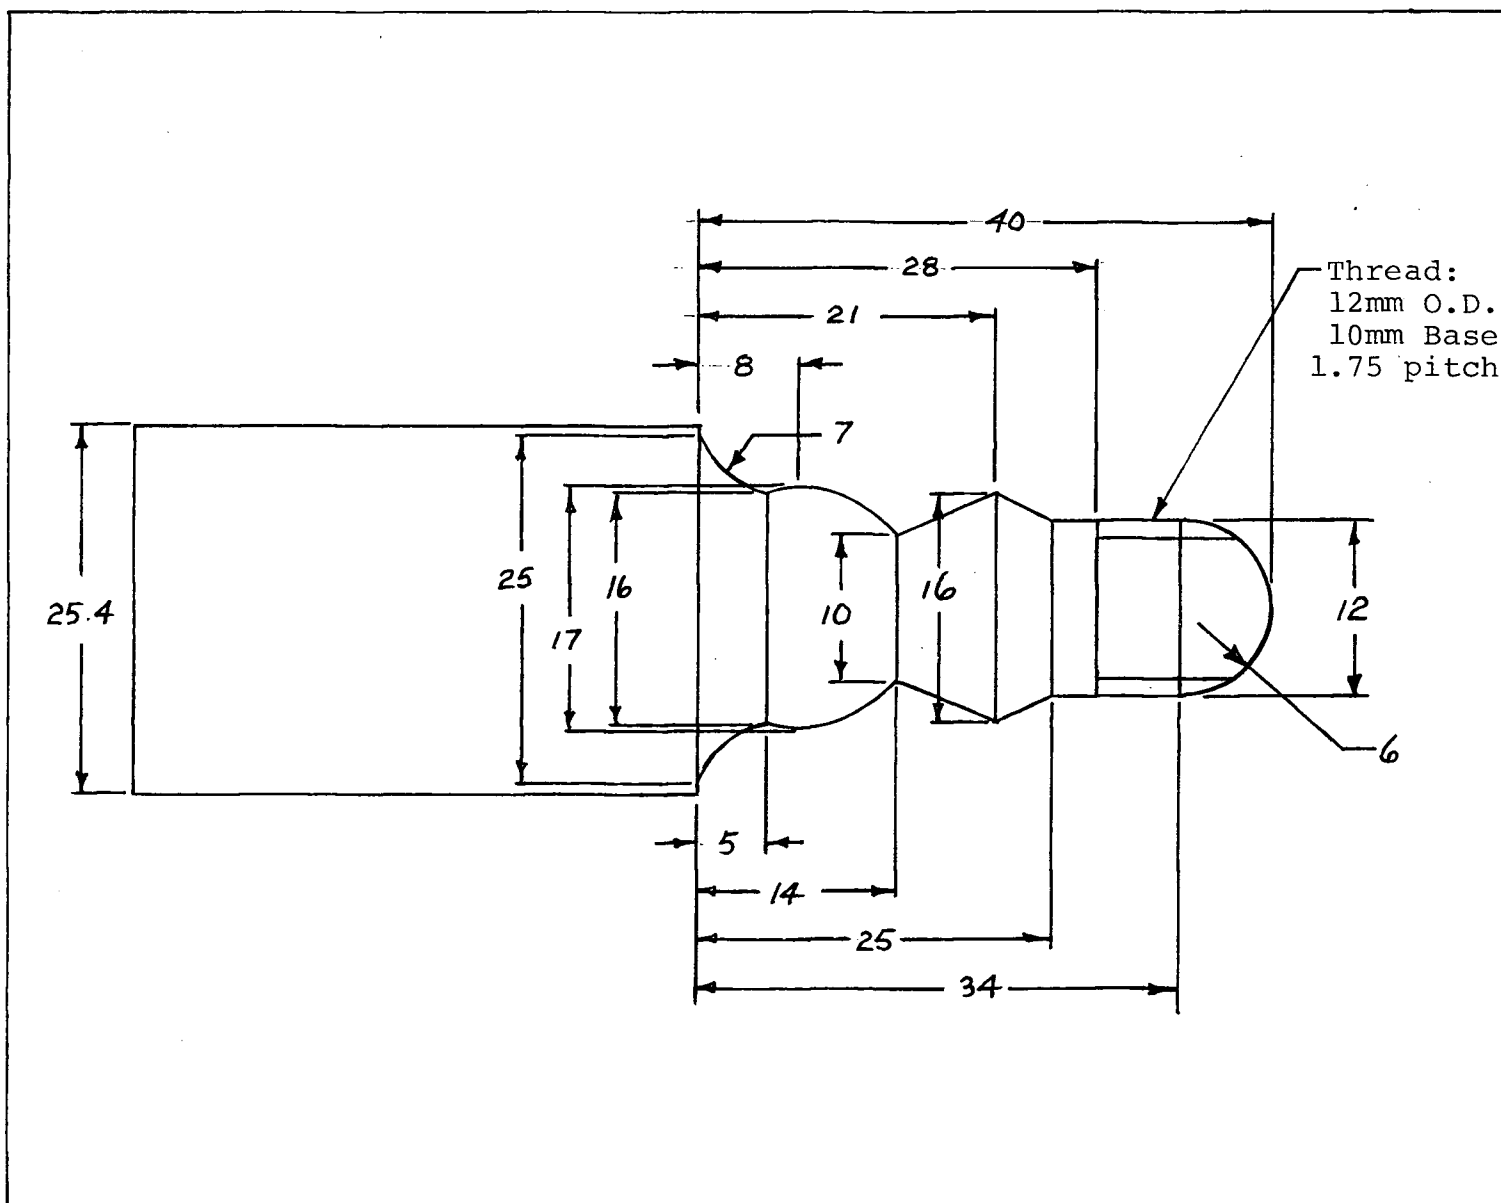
Dimensioned Drawing of ORACAP Master Piece.
